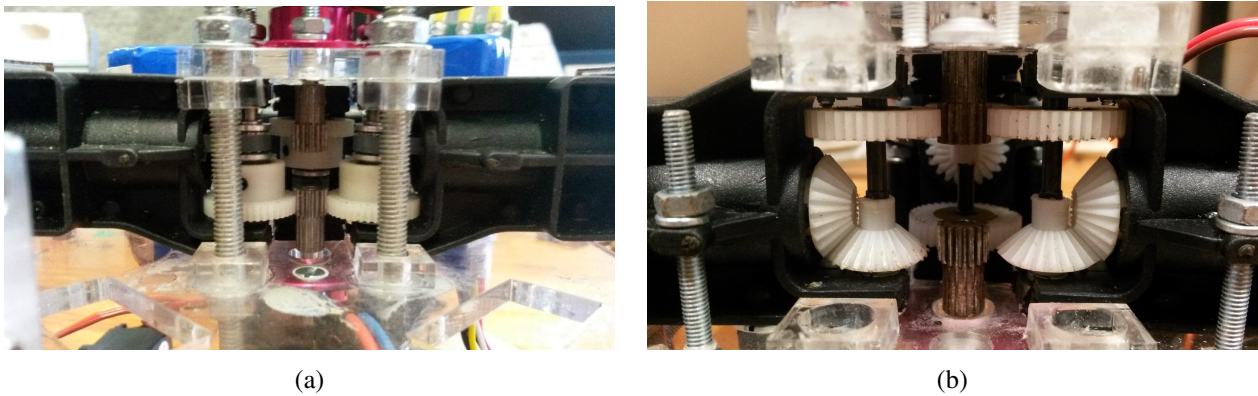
(a) First design iteration of variable-pitch quadcopter gearbox, showing co-axially mounted motors driving central gearbox. Power transmission from the gearbox to rotors is facilitated using timing belts. (b) Second design iteration of variable-pitch quadcopter gearbox, showing co-axially mounted motors driving central gearbox. Power transmission from the gearbox to rotors is facilitated using a shaft and bevel gear pair. Both images are shown from the perspective of a removed rotor arm.
